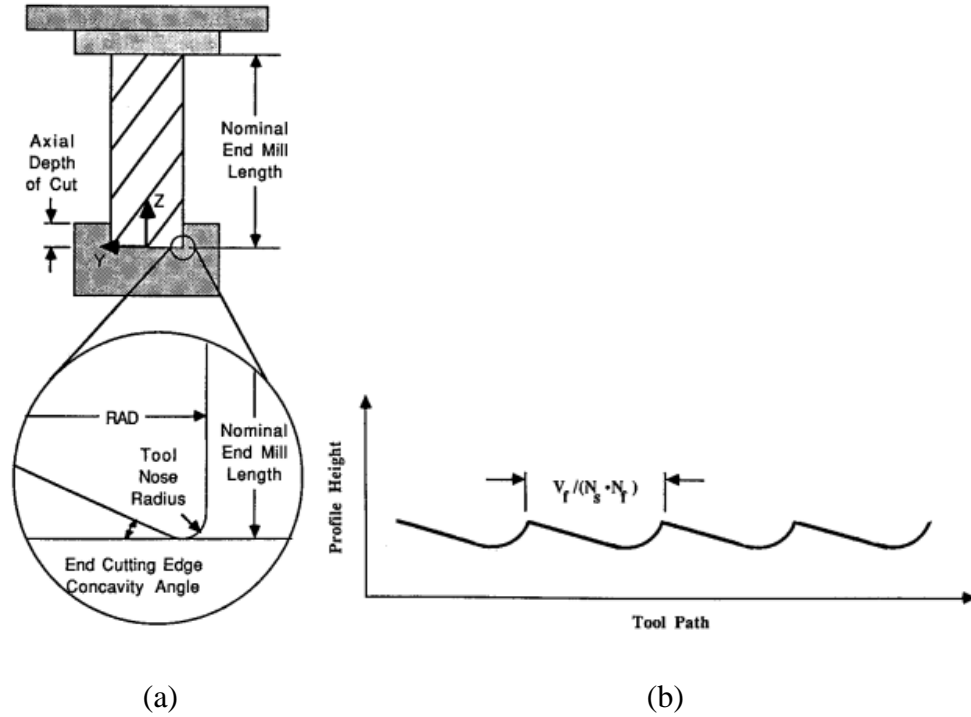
(a) End milling process and geometry (b) Surface profile for straight cut after end mill cutting (Sutherland and Babin, 1988).
